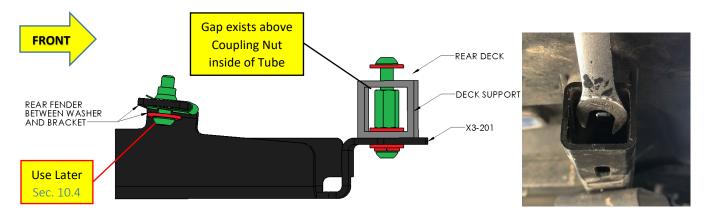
Installing Rear Air Tank Bracket, Proper Bolt Orientation (partial bracket shown)
